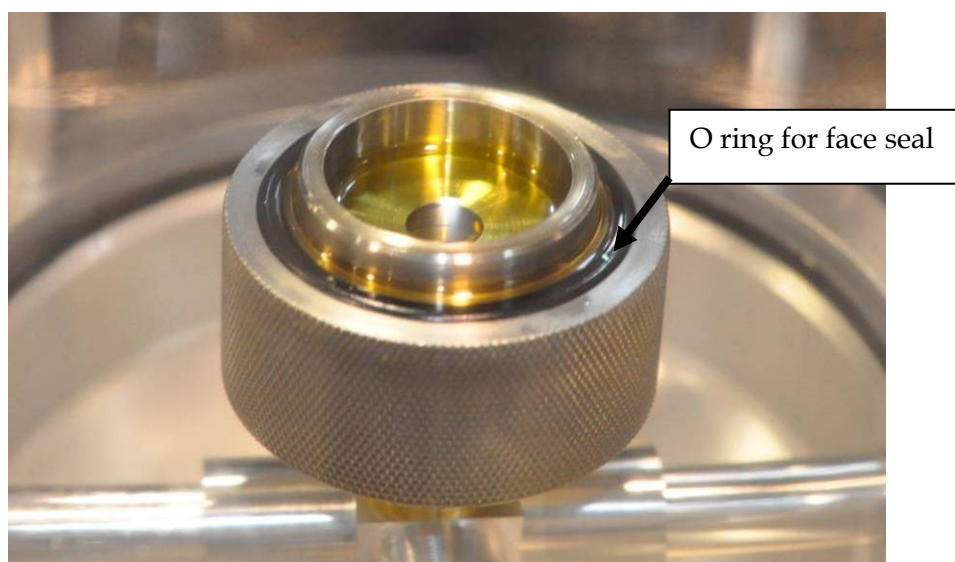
Bottom adapter for the T56 ESF showing o ring for sealing on filter element face.
